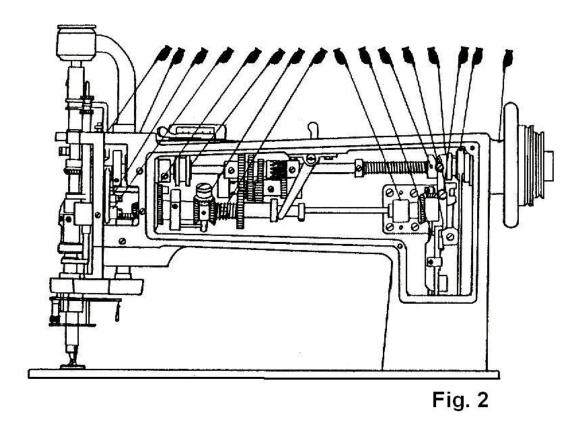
shows the arm cover removed for the purpose of oiling. This arm cover can be removed after taking out thumb screw, Fig. 10. If the machine is used continuously, oil should be applied at least once each day.
